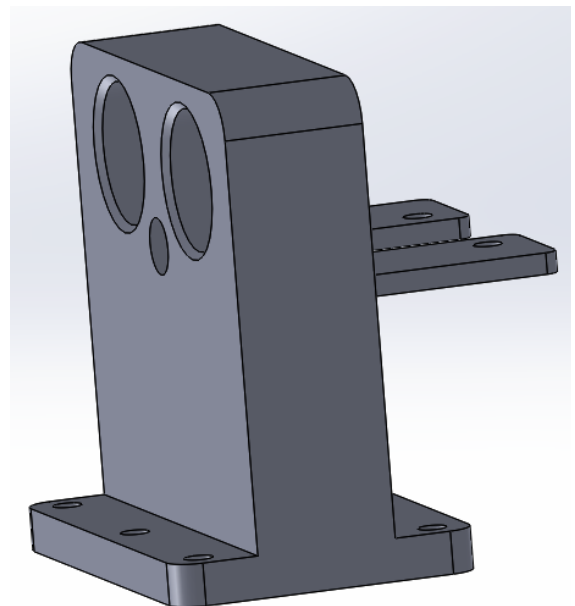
This part is attached to the chassis (Fig8.) Two holes are given through which 2 pipes supporting the Y-axis will pass. A stepper motor will be attached using the two extruded parts.
